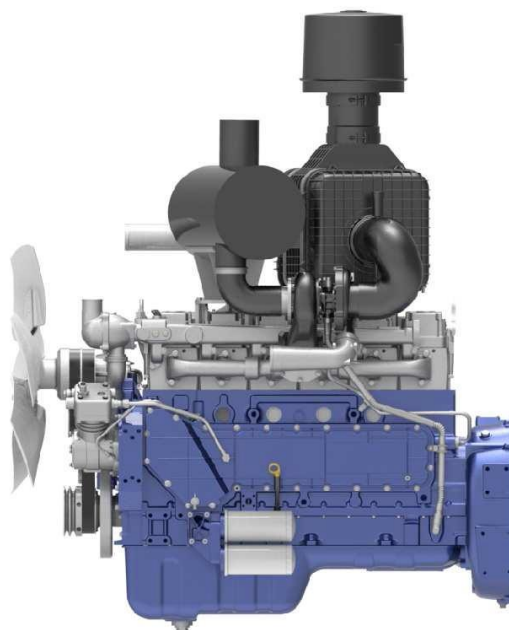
Exhaust Side of WP10 Four-valve Non-road Three-stage Diesel Engine
